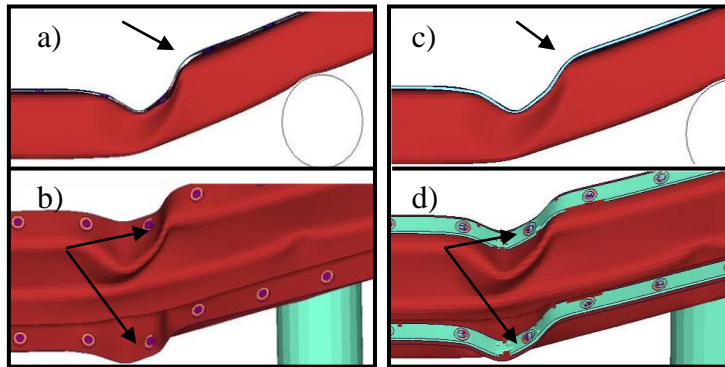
Usibor beams with 40 mm spot weld spacing, 1,0 mm sheet thickness and at high deformation rate. a) and b) resistance spot welded beams with spot failure c) and d) weld bonded beams with adhesive failure
